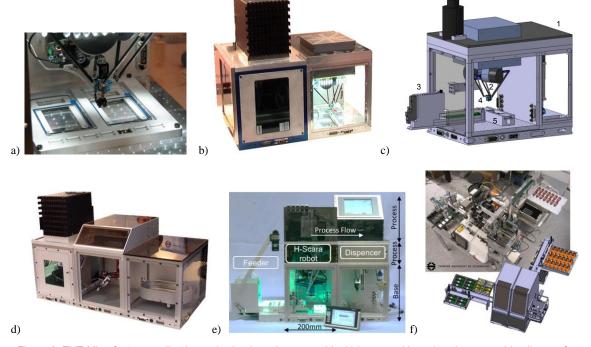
TUT-Microfactory applications: a) a loudspeaker assembly, b) laser marking, c) spring assembly, d) manufacturing of medical implant, e) gas sensor assembly, f) cell phone assembly. [26]
